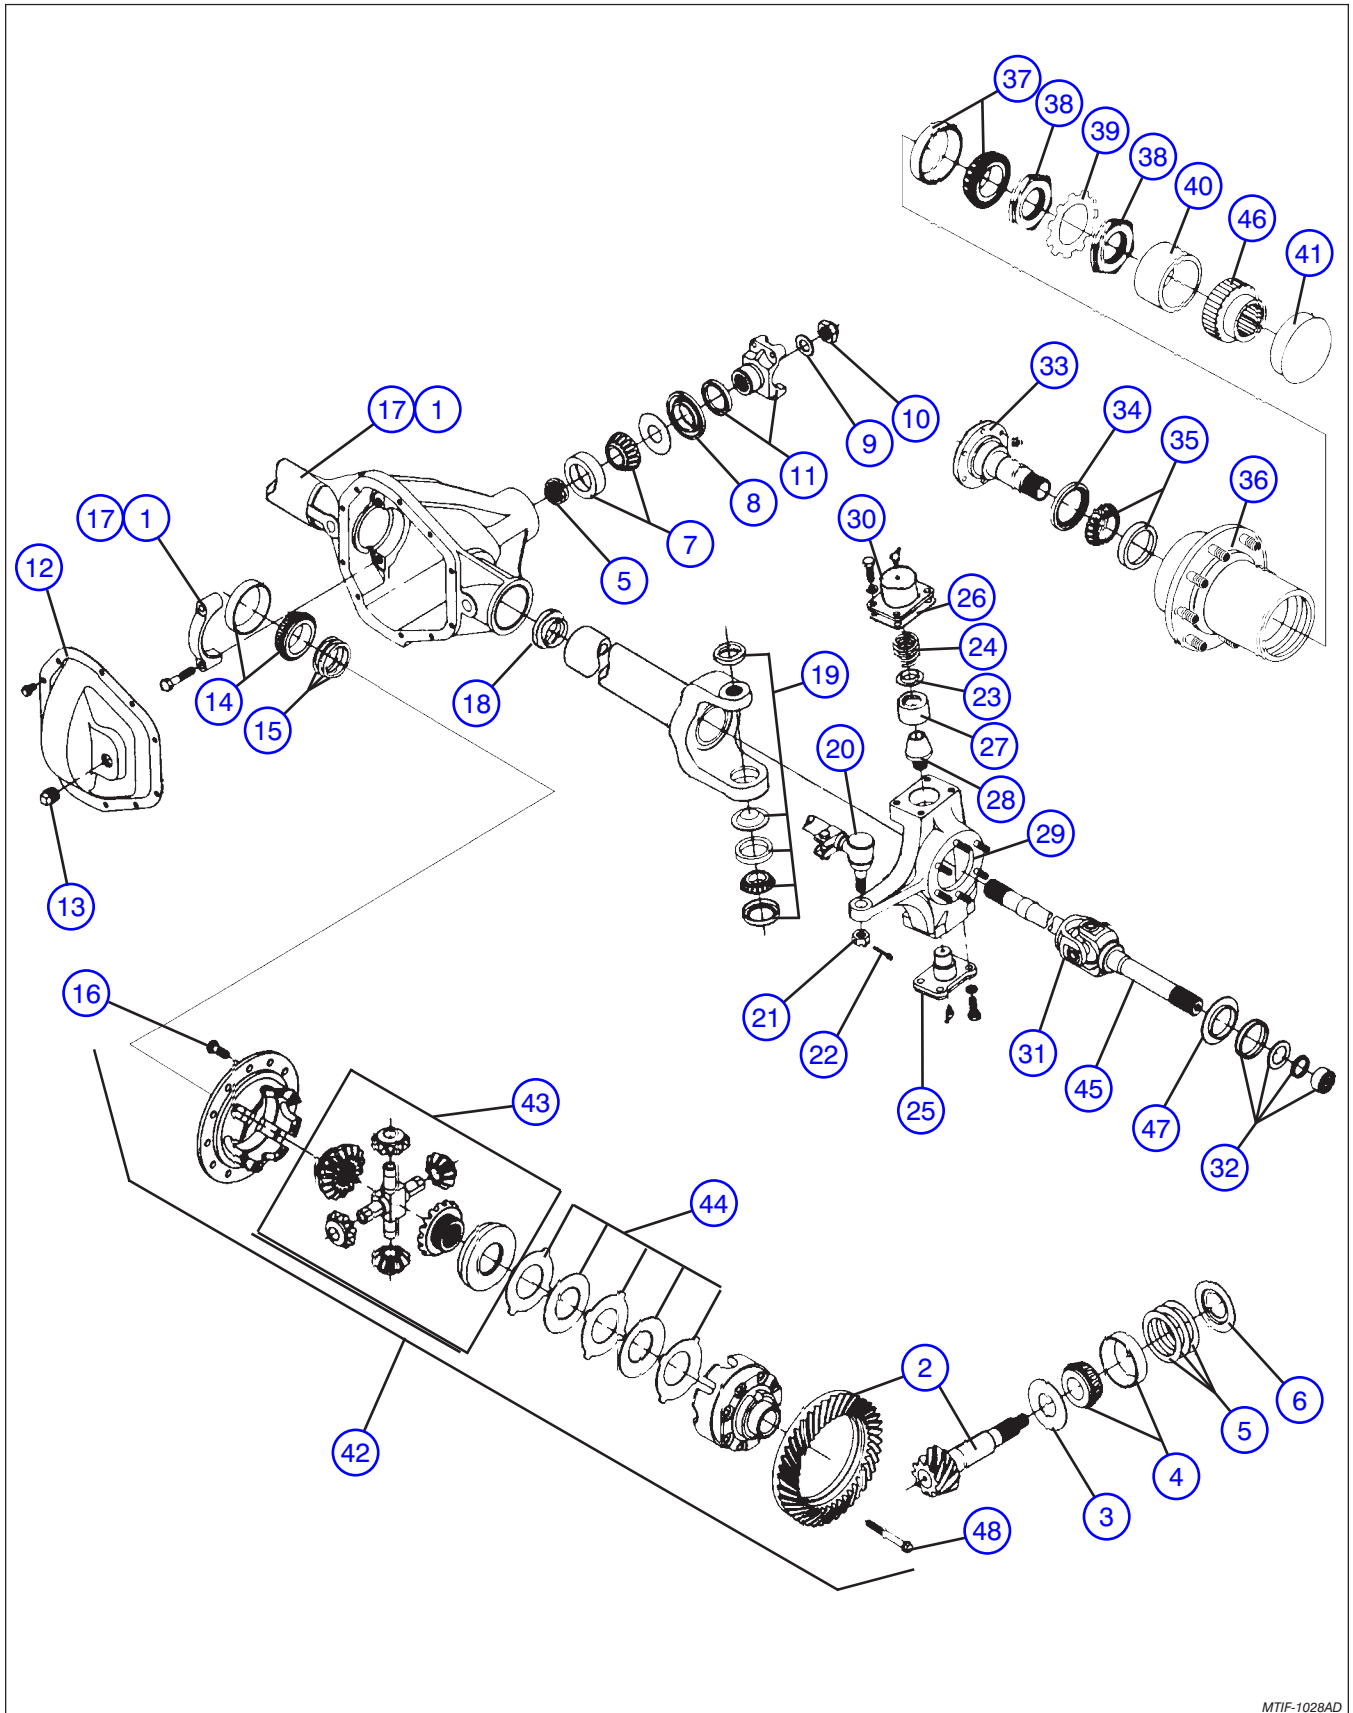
Front Axle Assembly - Hardware - All Wheel Drive Option (Dana Axles)
